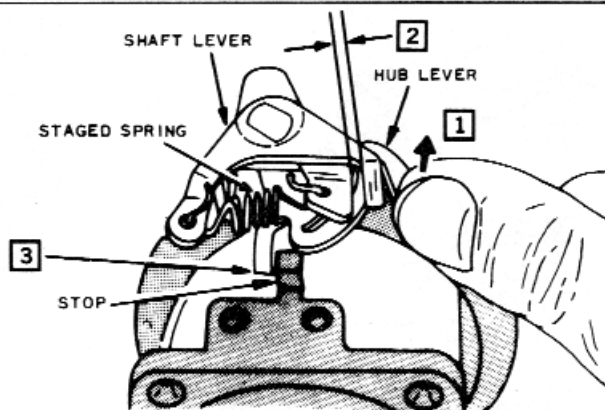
SPRING STAGED CHOKE ADJUSTMENT
